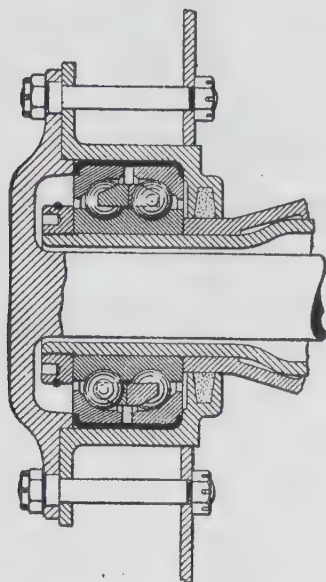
DRIVING WHEEL HUB ON SINGLE BALL BEARING.
